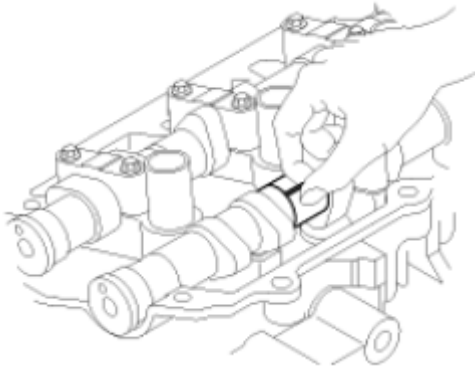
Laying Strip Of Plastigage Across Of Camshaft Journal
